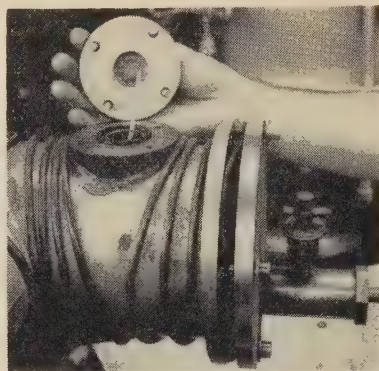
Typical sealing methods for metal retorts. Thermocouple wires are solder-sealed in small tubes with low-melting solders or brazing alloys. Only three bolts are needed to seat the charging port at right, since the seal is tightened as the pressure inside is reduced. Movable rod projecting from the port cover manipulates the charge in the furnace.
